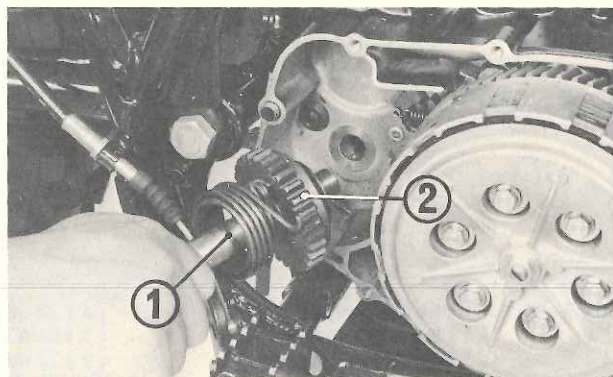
(1) 22 mm thrust washer (2) Kick starter pinion
